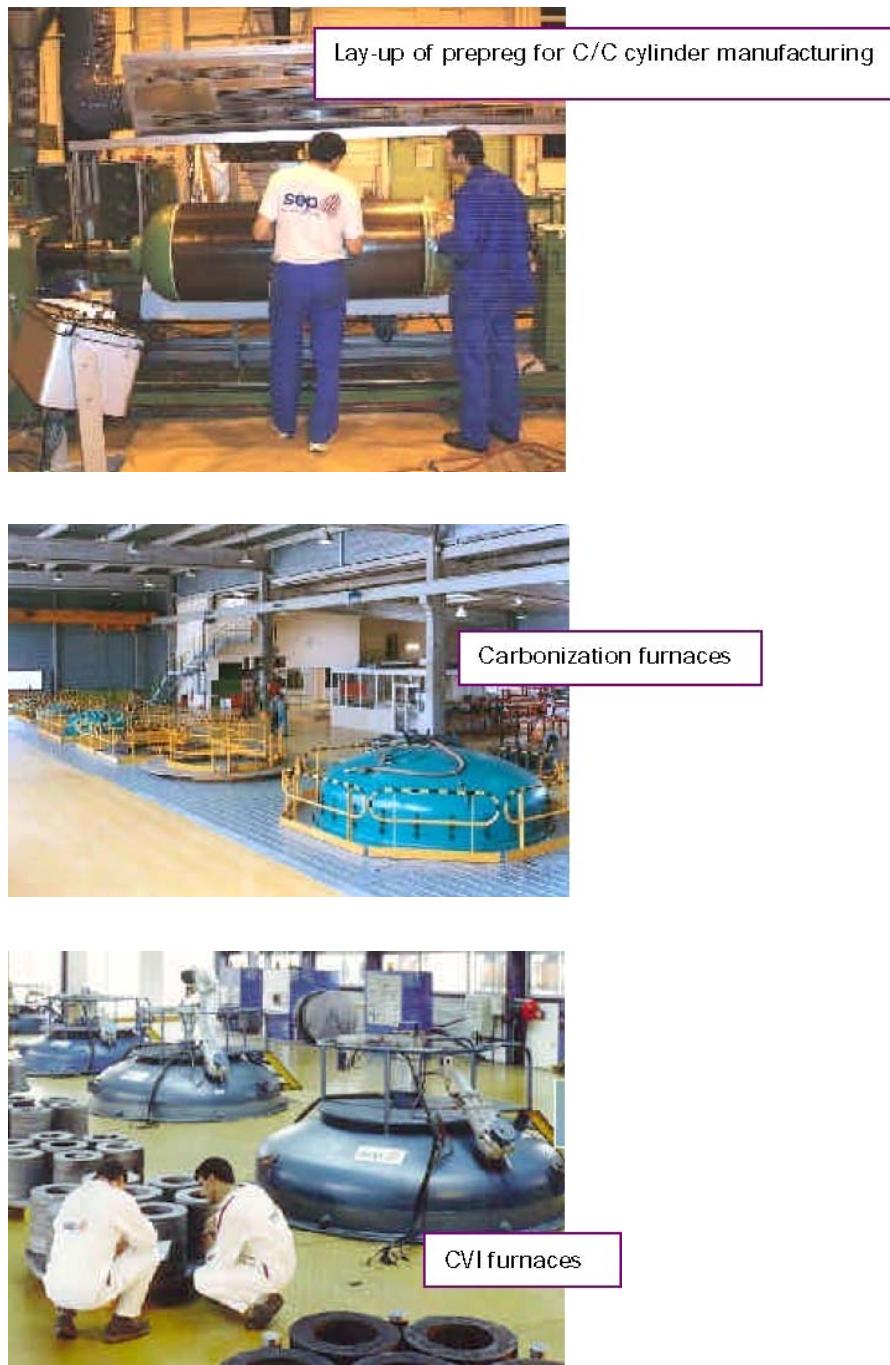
Carbon-carbon composites: Manufacturing process equipment
